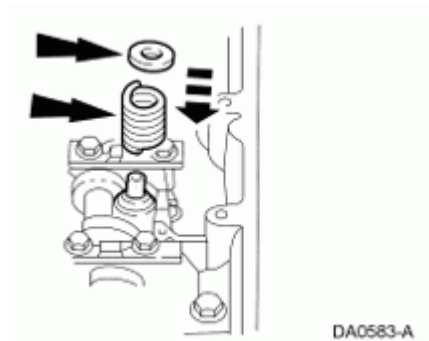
Installing Valve Springs And Valve Spring Retainers Onto Valves
